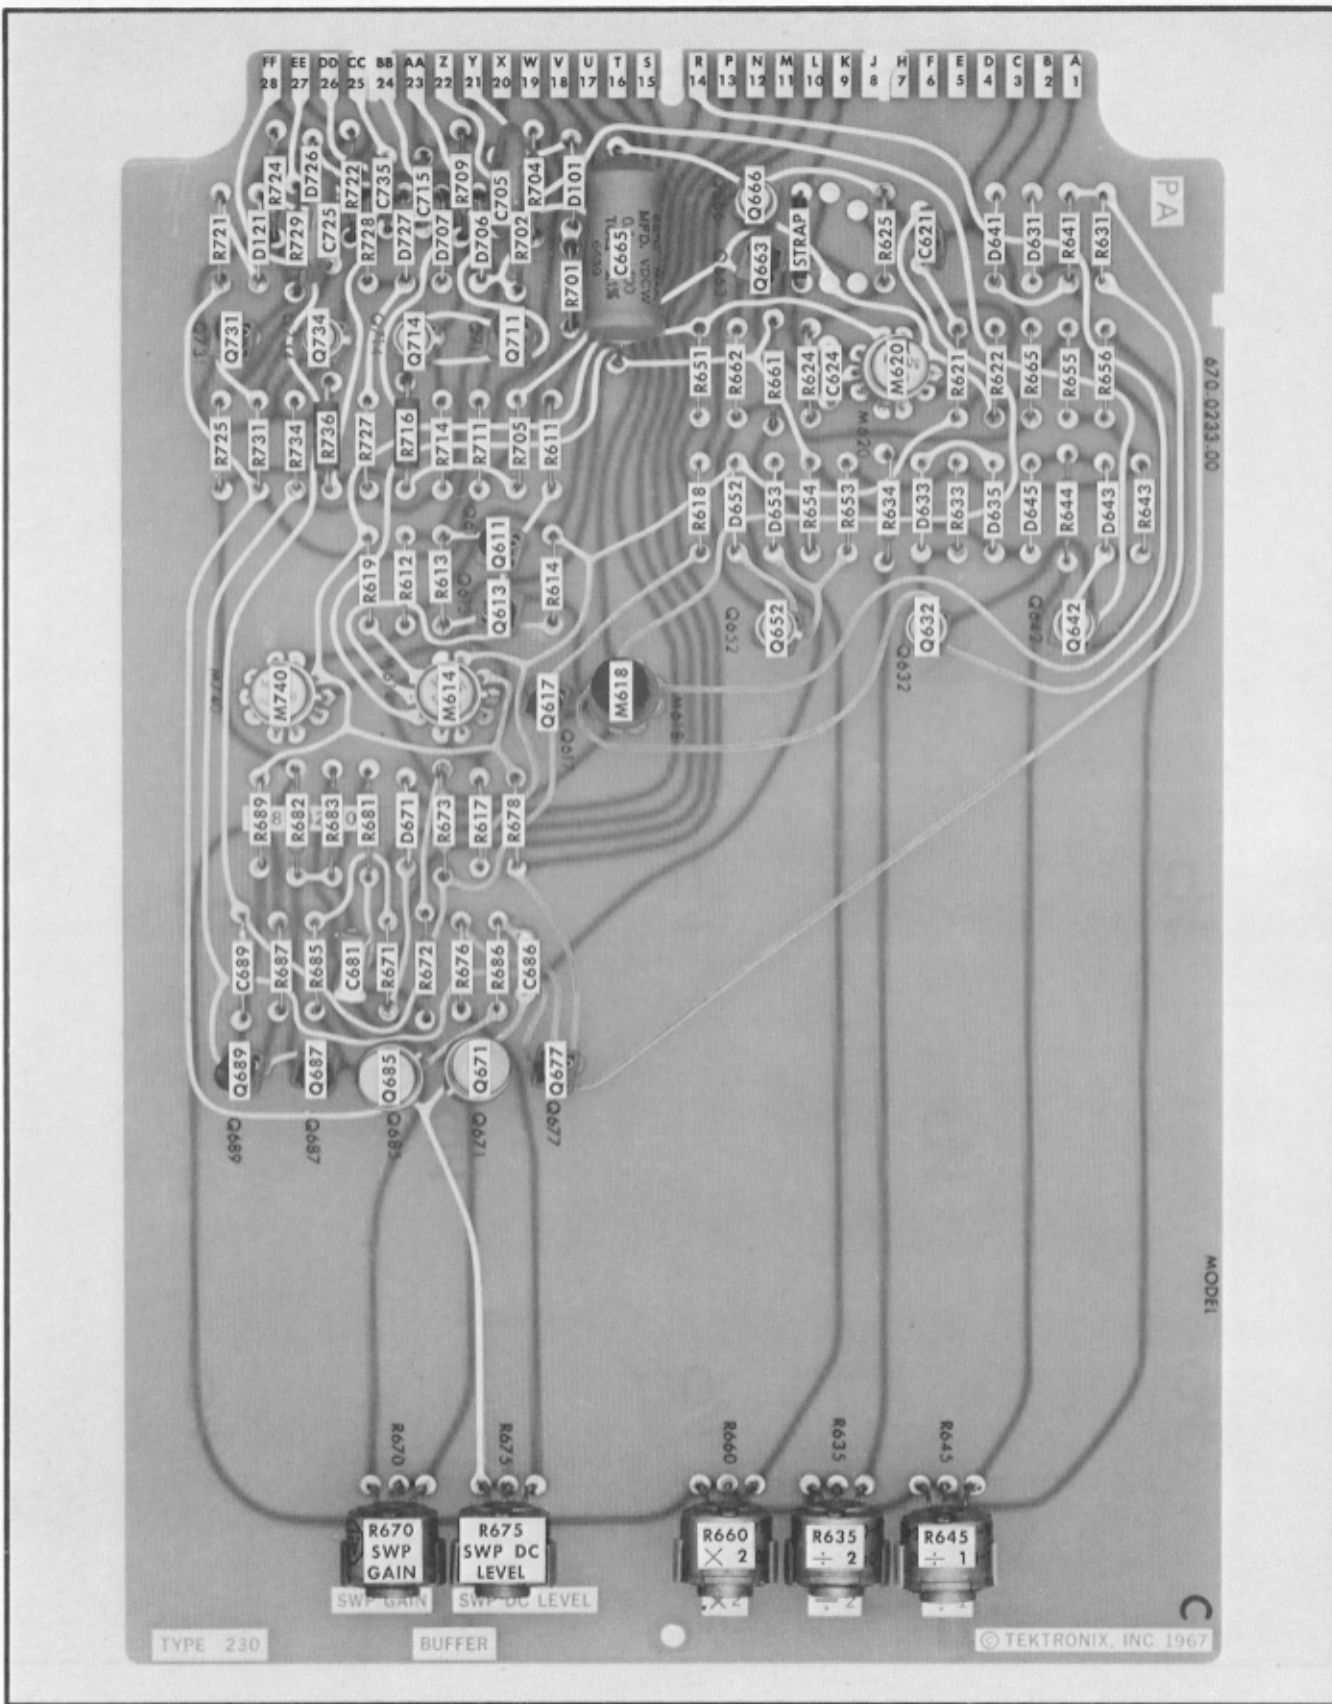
Component locations on the Buffer card (Models 1-3).
